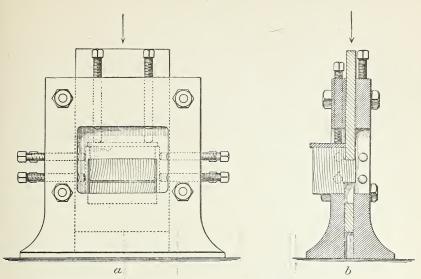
Specimens and tool used in shearing tests, both radial and tangential to grain.
